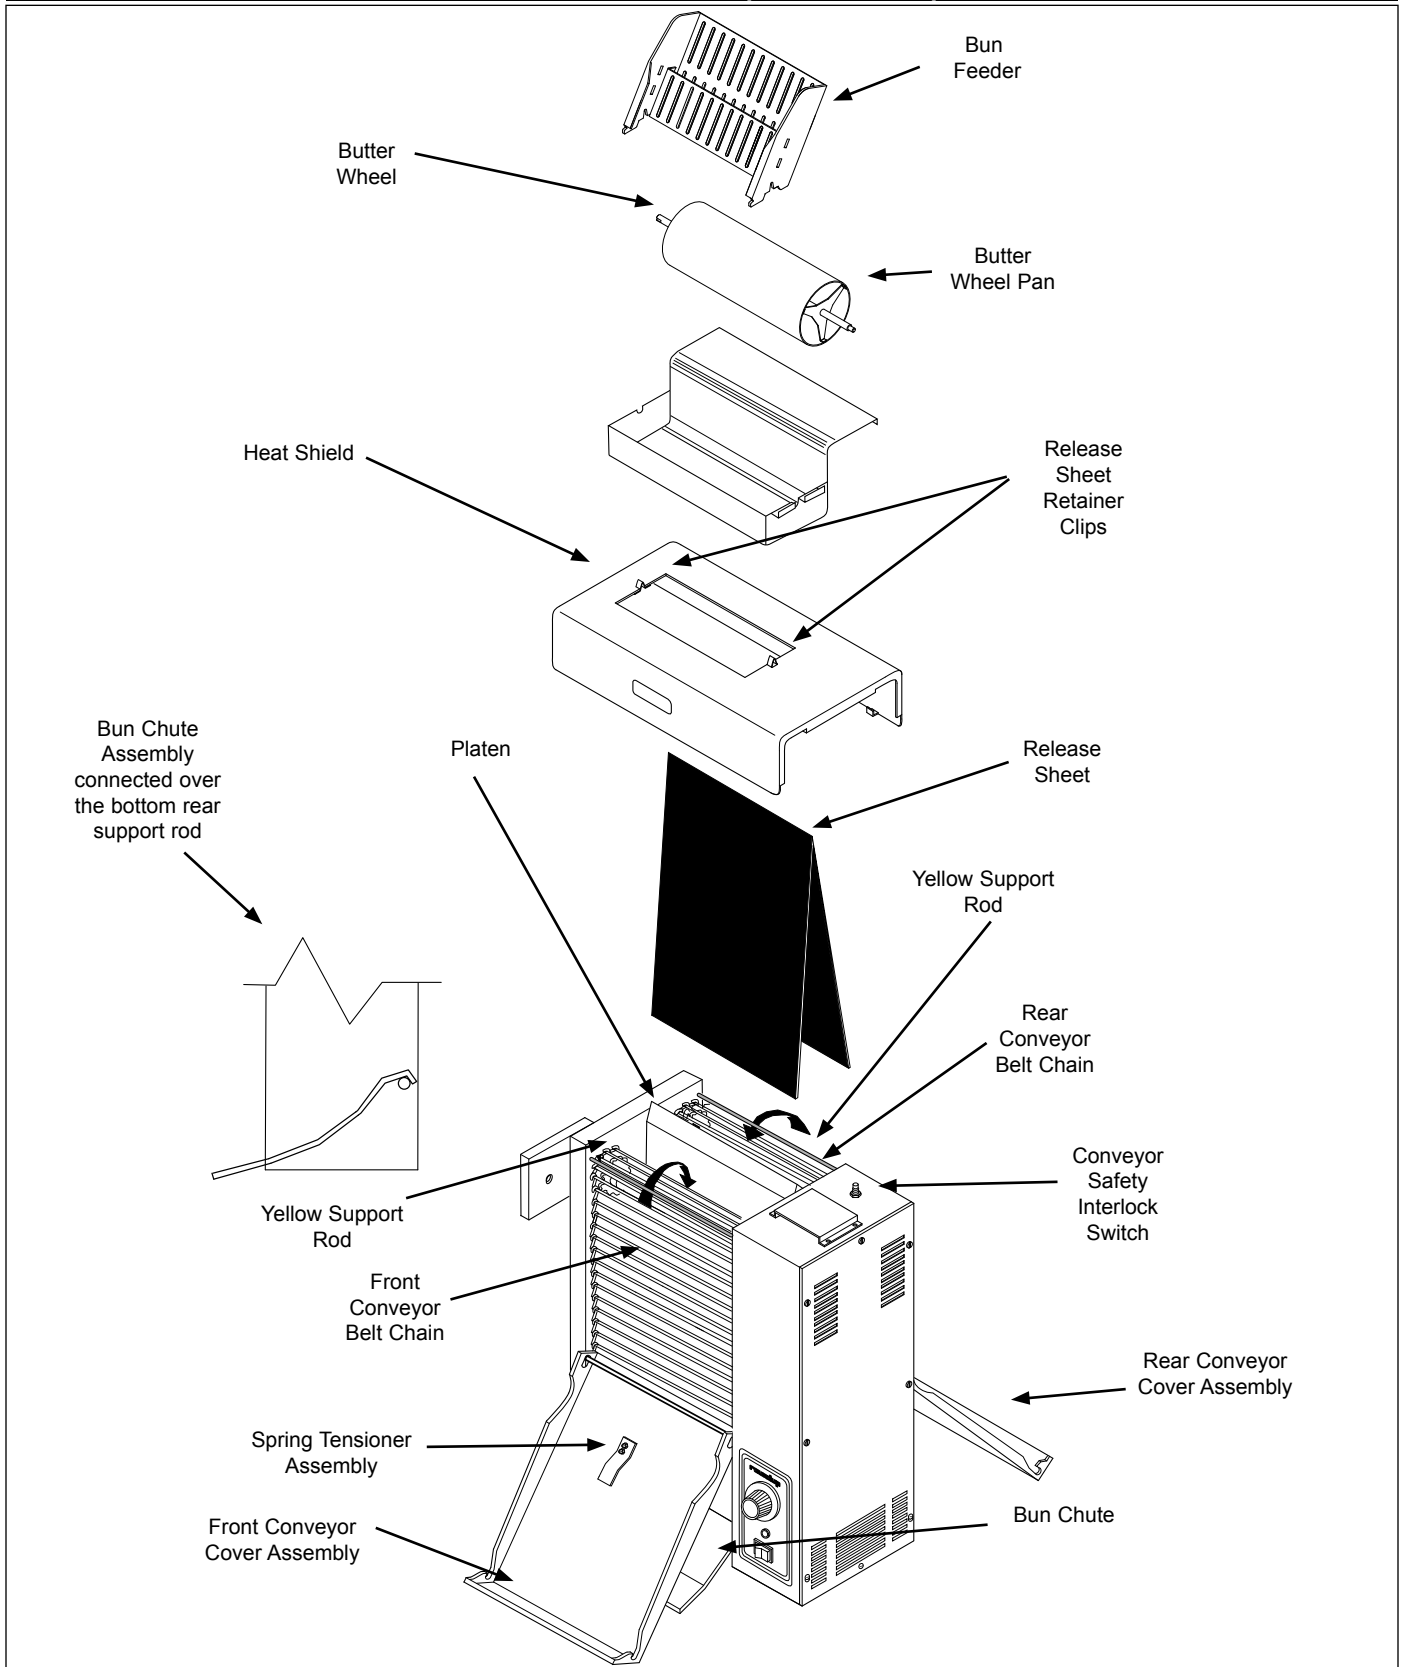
VCT-1000 Toaster With Mechanical Driven Butter Wheel
